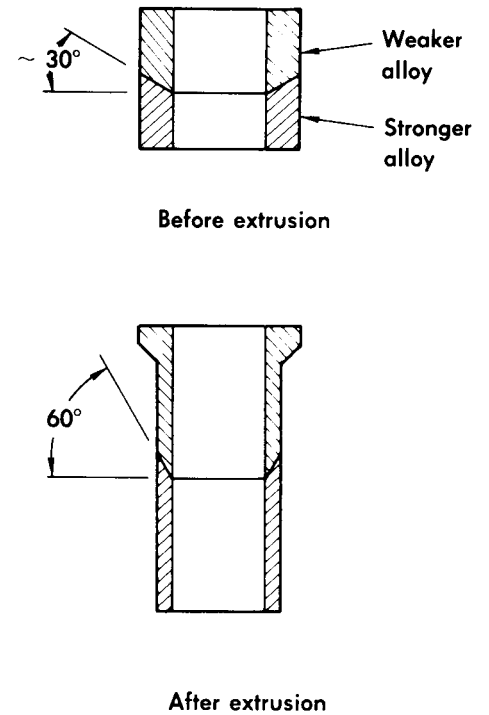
Design for butt welding of tubes by extrusion
